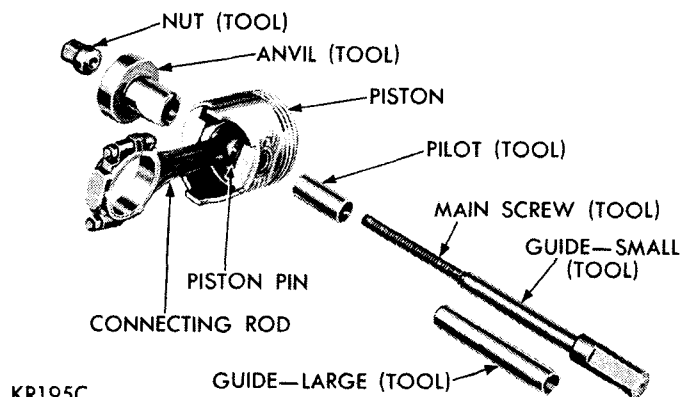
Arrangement of Tool C-4158 For Removing Piston Pin
